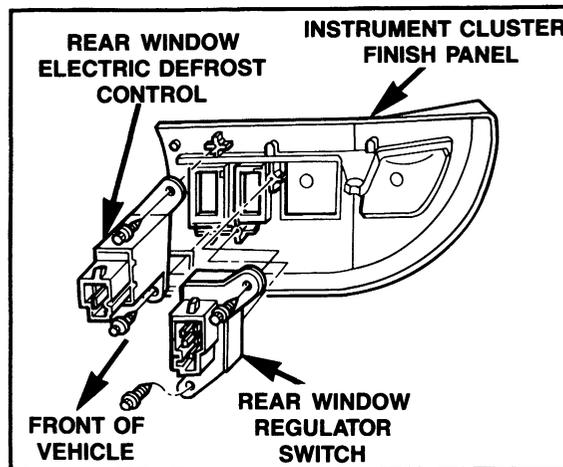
Rear Window Electric Defrost Control and Rear Window Regulator Switch (Rear View)
